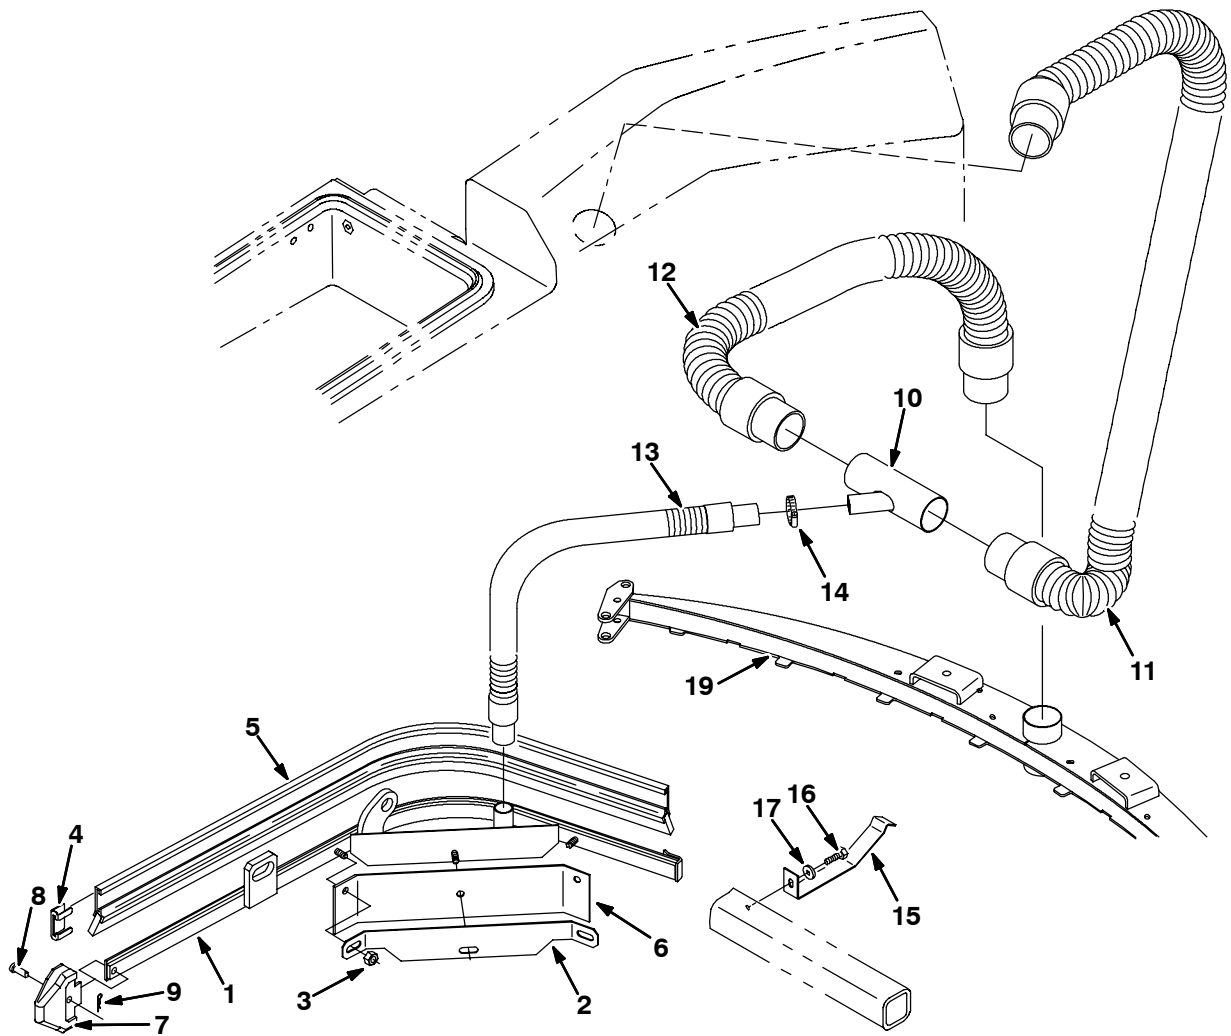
Recovery Tank Vac Hose Assembly, Vac Side Squeegee
